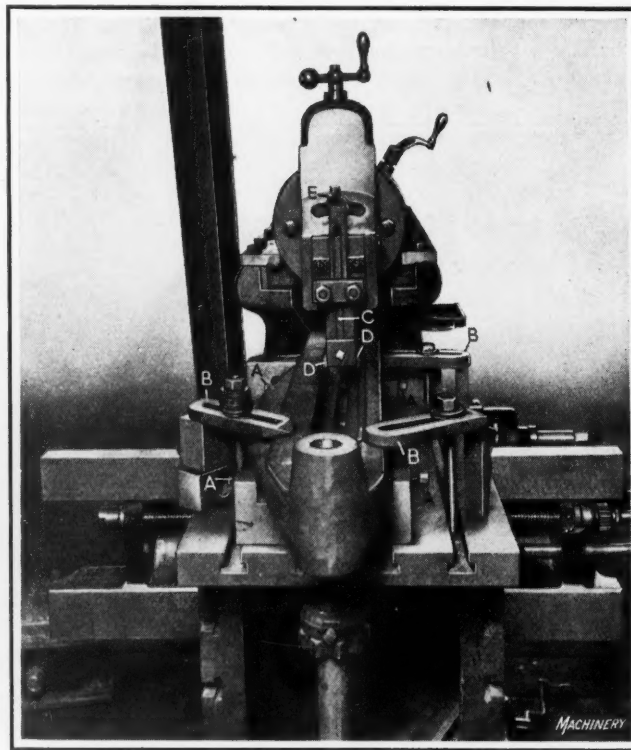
Crank Shaper equipped for simultaneously planing Sides of Slot in Rocker Arm for a Shaper
